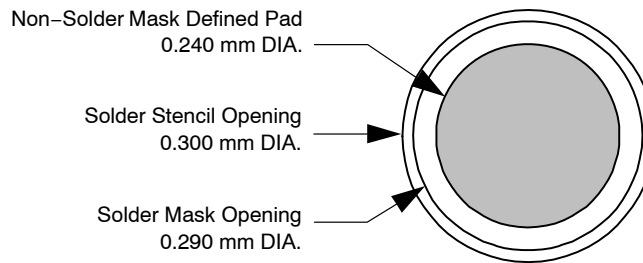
Recommended Non-Solder Mask Defined Pad Illustration
